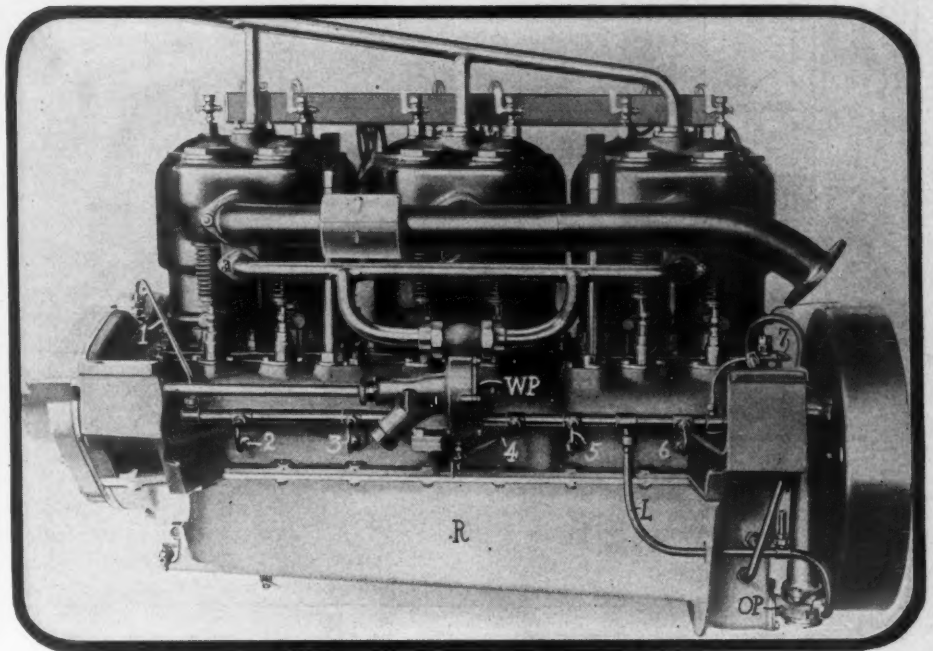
CIRCULATING OILING SYSTEM ON LOCOMOBILE SIX-CYLINDER MOTOR
